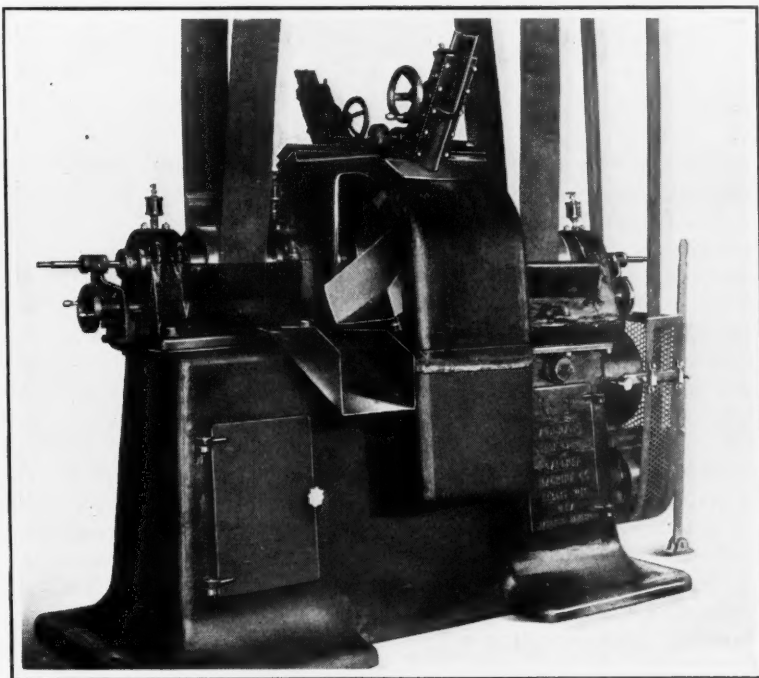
Gardner Automatic Double-disk Grinding Machine for Parts having Two Parallel Sides of about Equal Area
